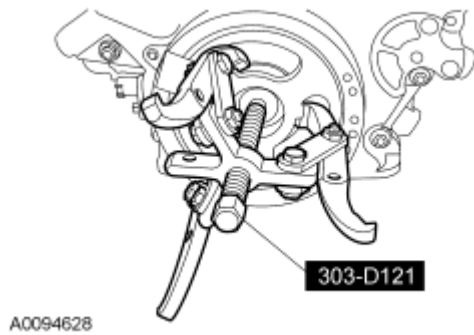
Identifying Special Tools (303-D121) And Crankshaft Pulley
